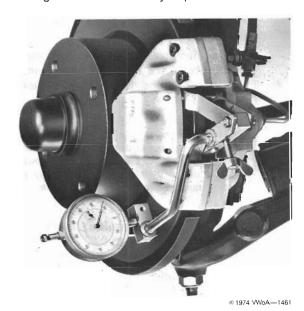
Brake disc runout being measured. A dial indicator on a magnetic base can also be used.
